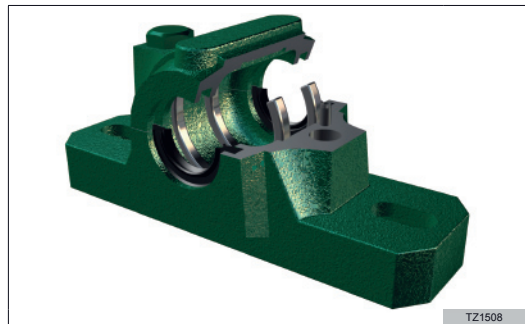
Solid “standing” bearing housing for self-aligning ball bearings and spherical roller bearings of SNU-type
